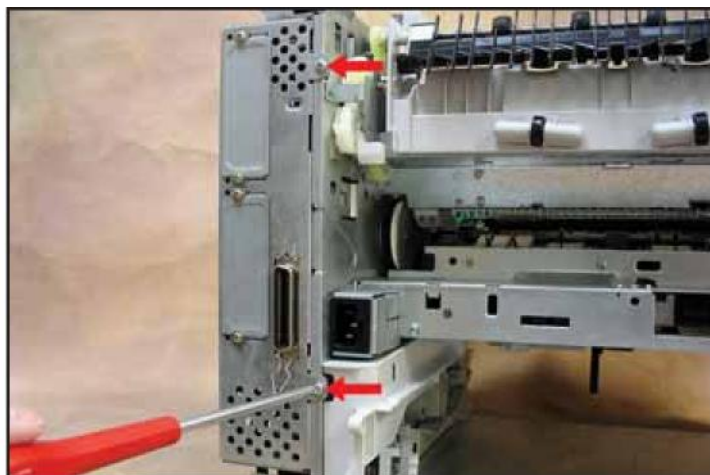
The red arrows indicate the two screws that attach the formatter and its cage to the printer.
